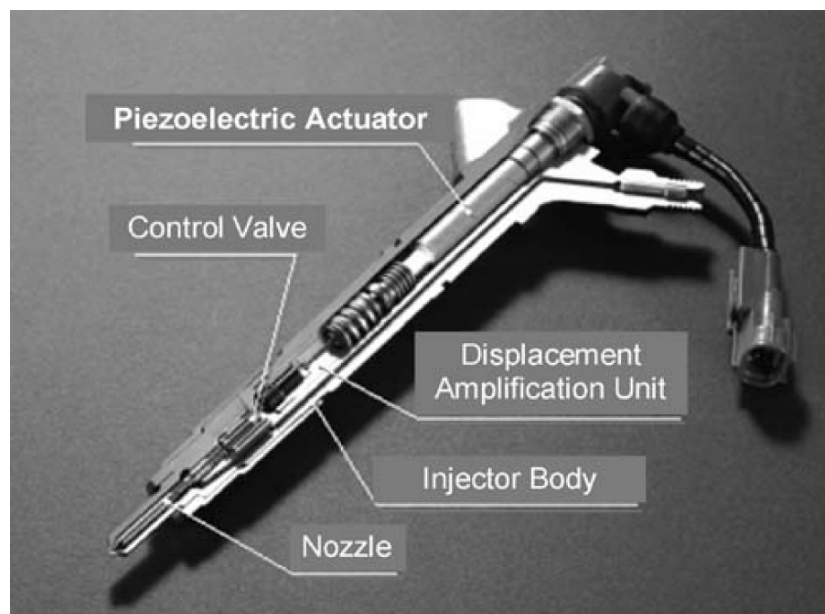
Diesel injection valve with a piezoelectric multilayer actuator [38].
